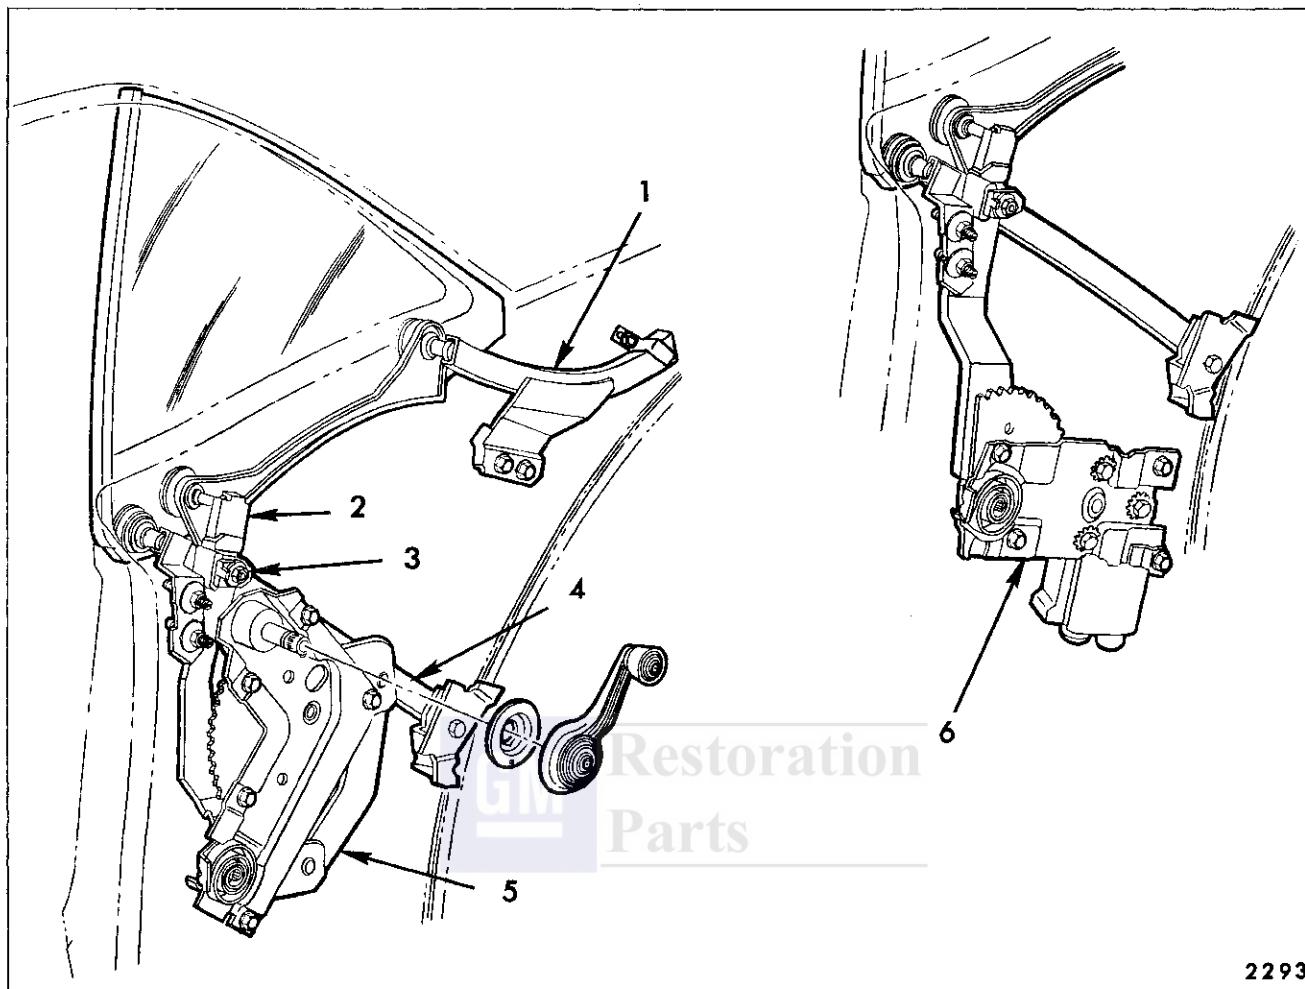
Rear Quarter Window Assembly - "E-87" Styles
